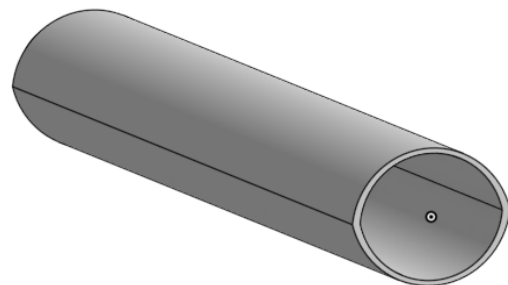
Shaft structure of fuselage-mounted rotor.
